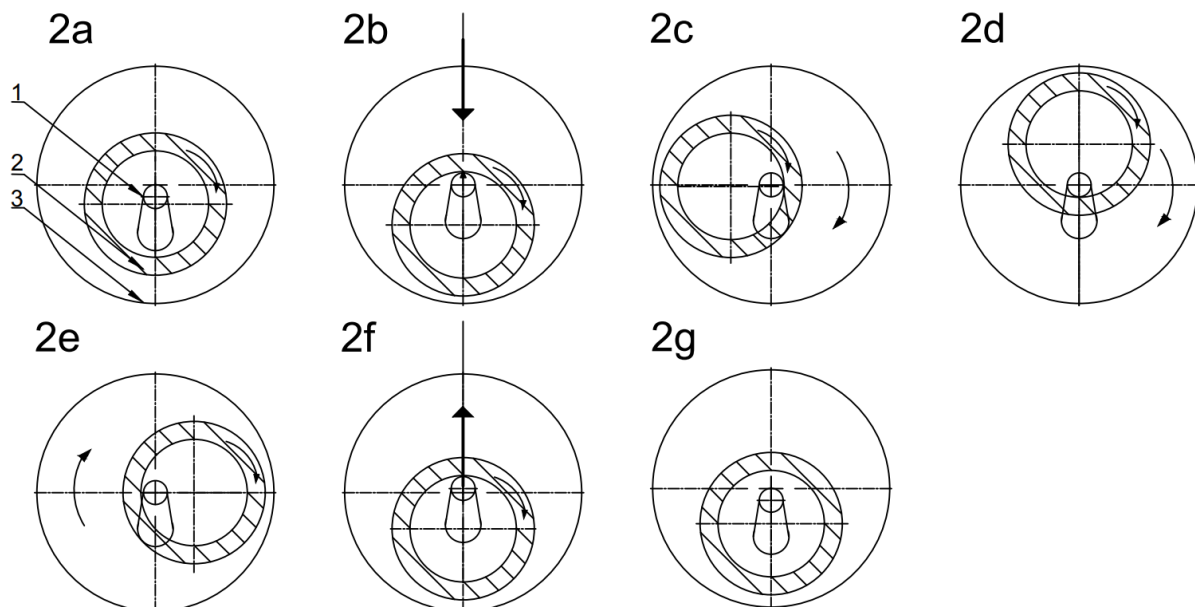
Machining stages of crankshaft's crankpin during planetary milling:
